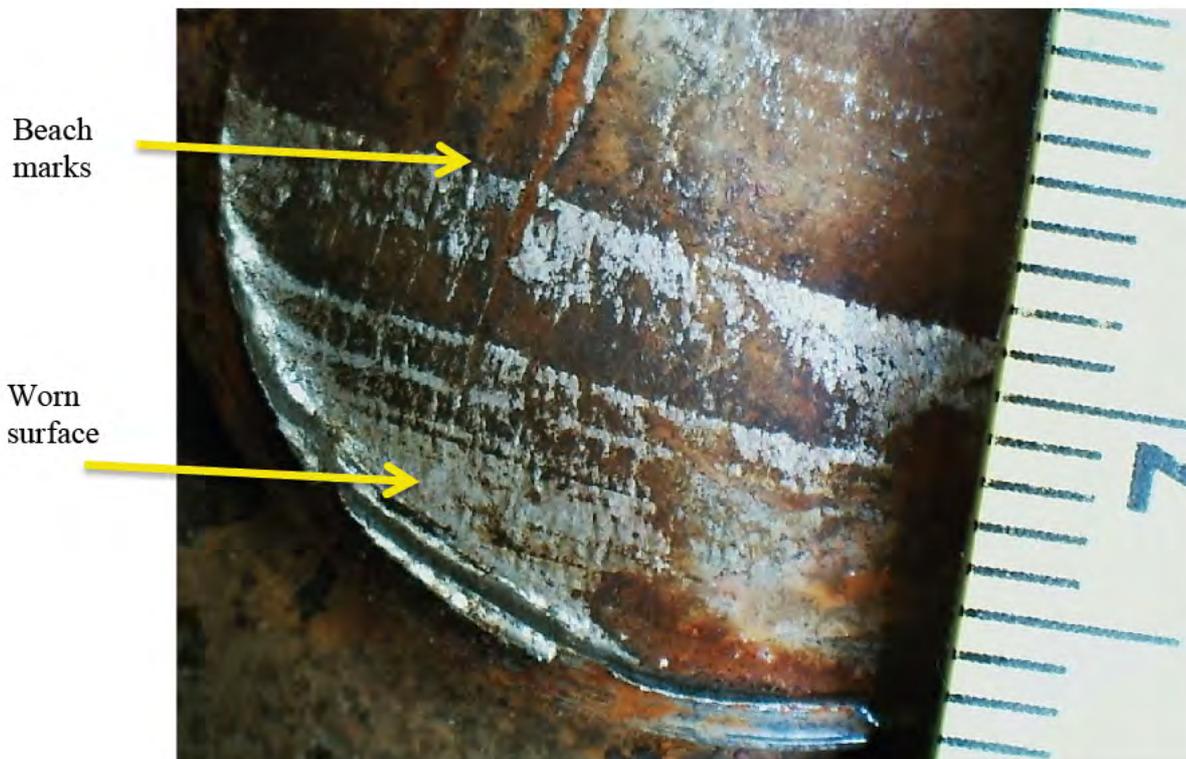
Macroscopic image showing beach marks (confirming fatigue) and a worn surface indicating sustained contact after fracture at position 3.
